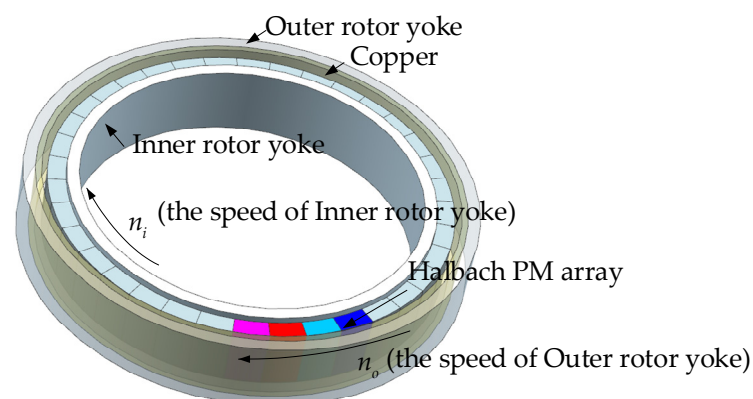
Three-dimensional view of an ECC with Halbach magnet array.
